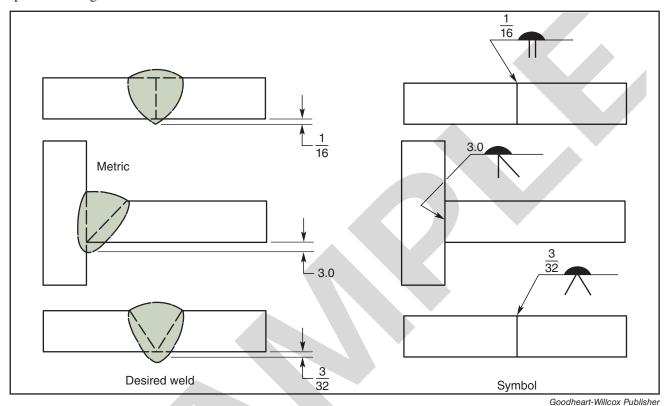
A melt-through symbol requires full joint penetration in a weld made from only one side. The number indicates the amount of penetration.
